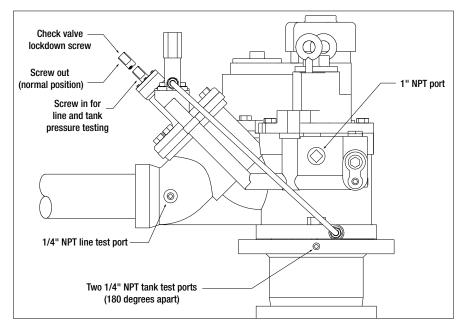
Maxxum Packer-Manifold Assembly: Line and Tank Testing
